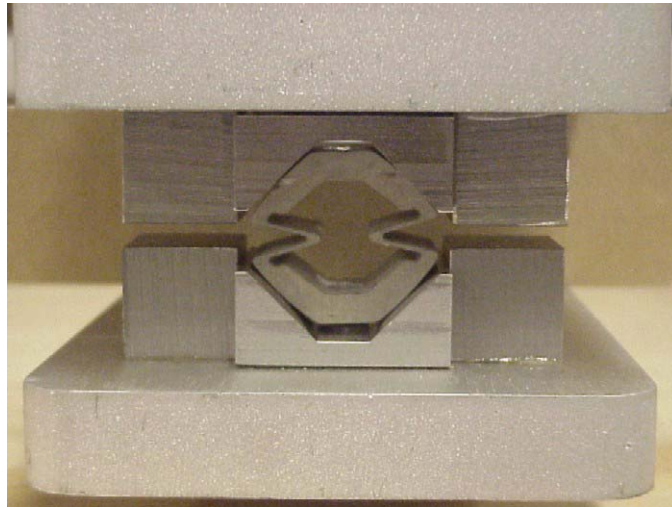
Aluminum locator clamped between vee grooves with side datum blocks on test fixture.
